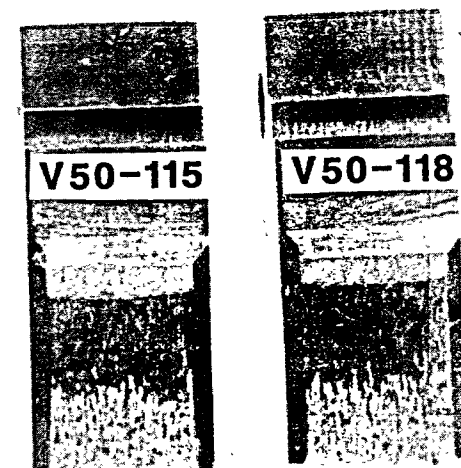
Fracture surfaces of the 0.5T-CT specimens.
